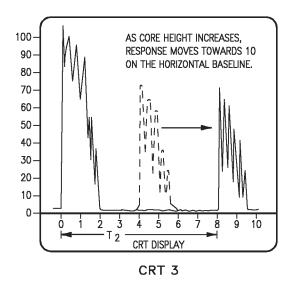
Setup for Inspection of Honeycomb Core Sandwich Assemblies (Sheet 4)
